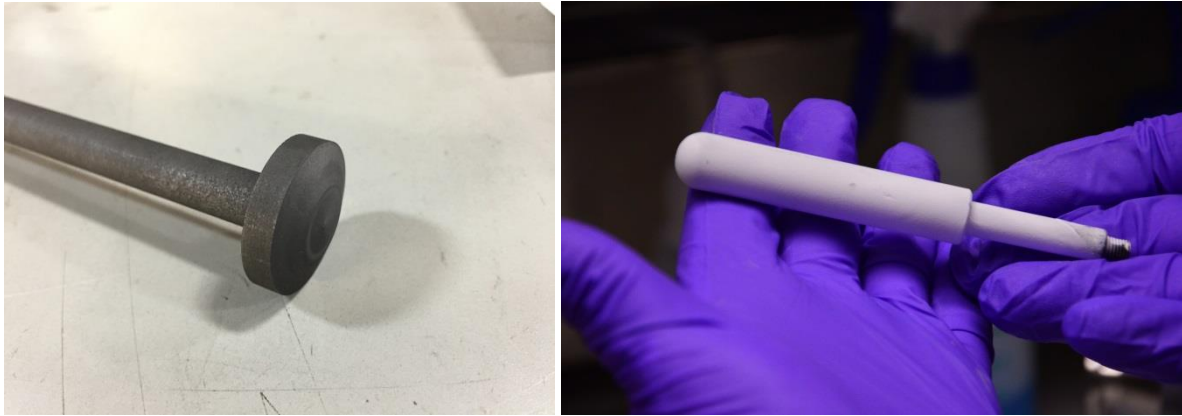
Initial design of nearly flat-bottomed stopper rod (left). Modified stopper rod design with larger radius (right).
